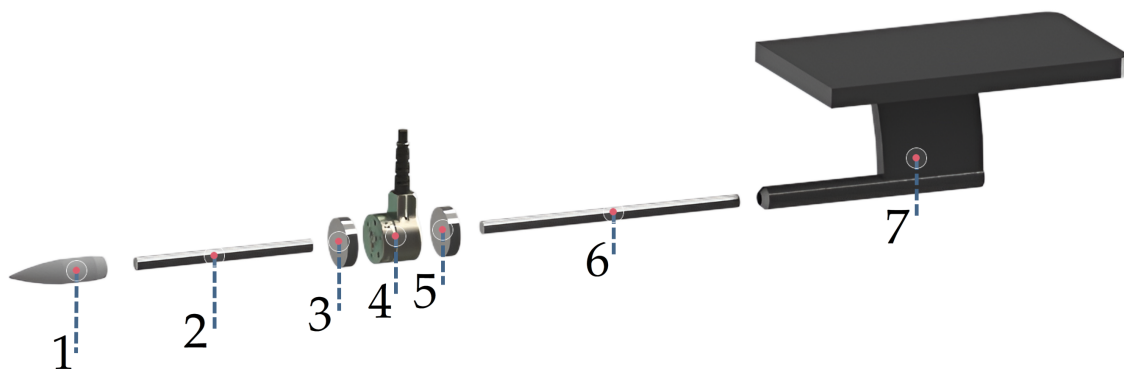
Exploded view of the aerodynamic forces measurement setup: (1) Projectile, (2) Front sting, (3) Front fastening washer, (4) Force balance, (5) Rear fastening washer, (6) Rear sting, and (7) Model positioning support.
